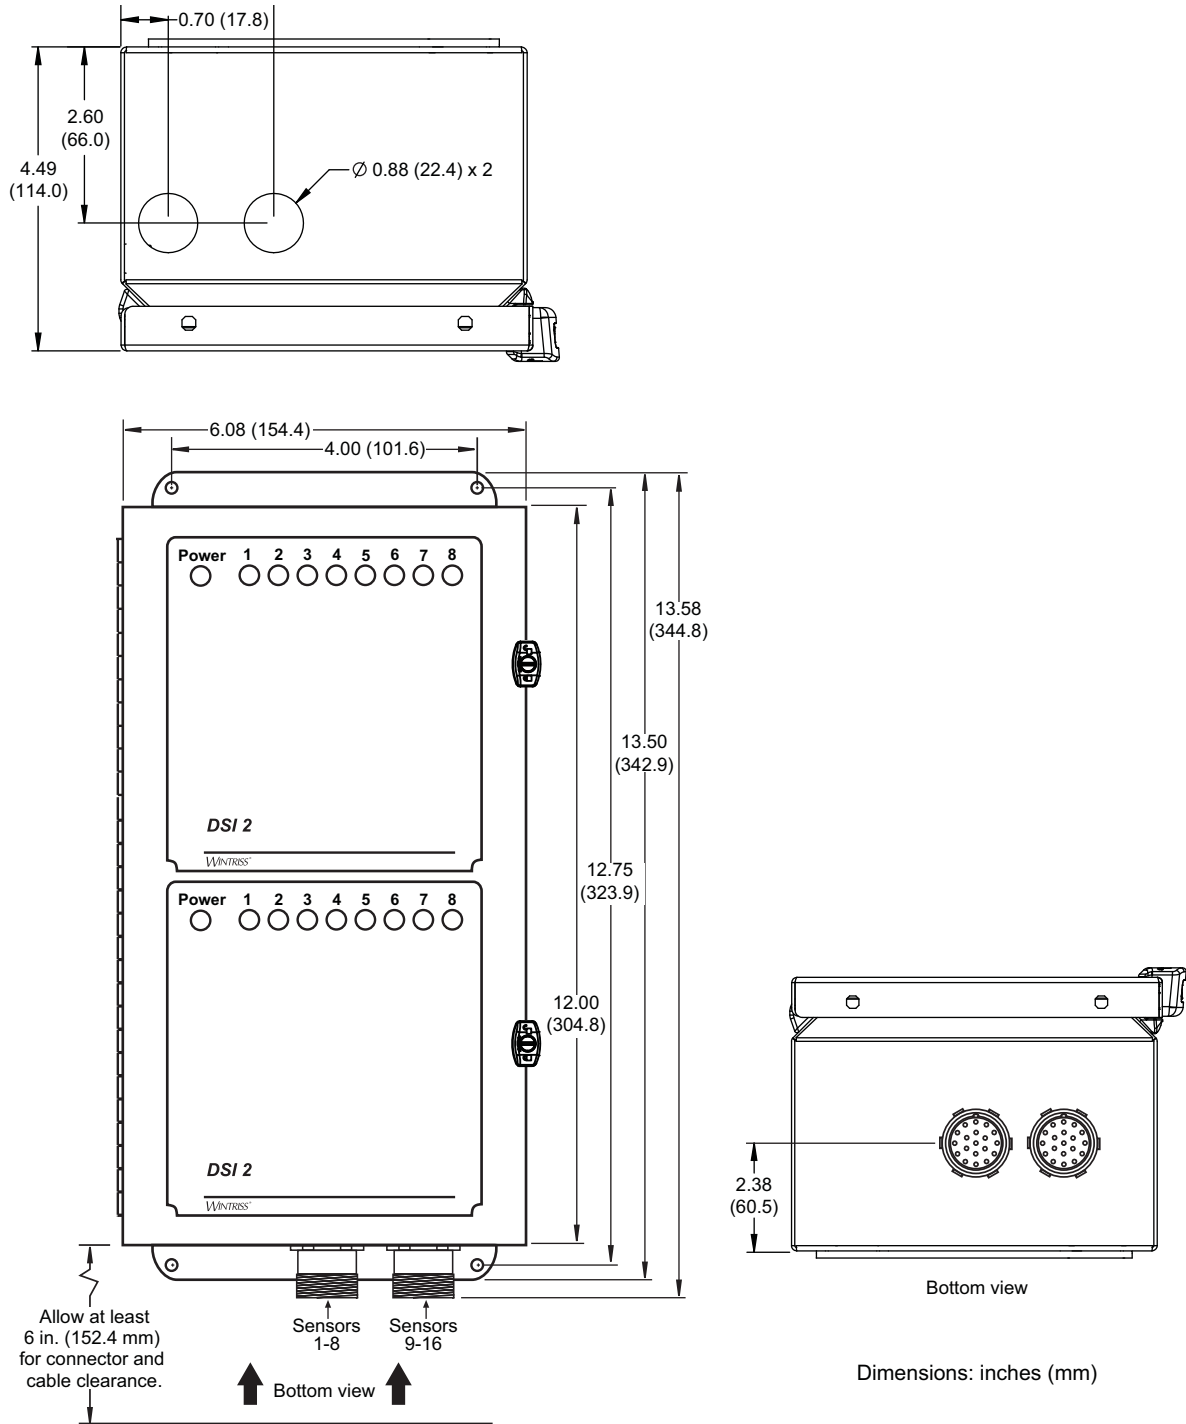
DSI 2 16-Input Enclosure: Mounting Dimensions
